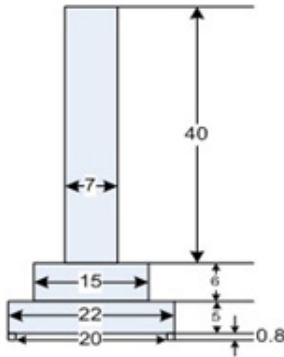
Pull-out Stub Dimension (AASHTO TP-91)
